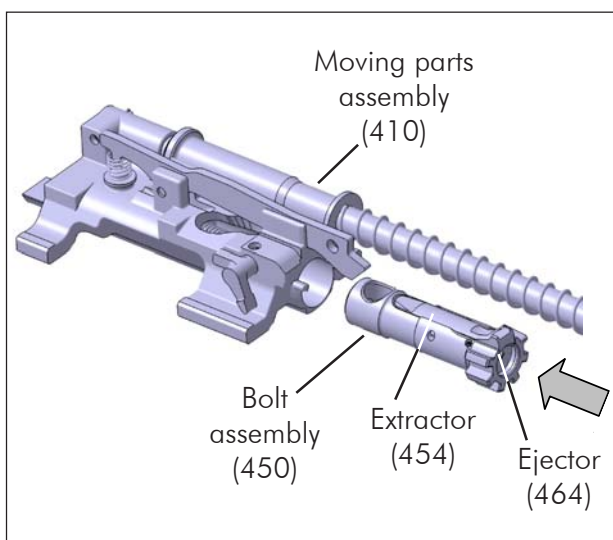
i - Reassembly of the bolt assembly (450)
